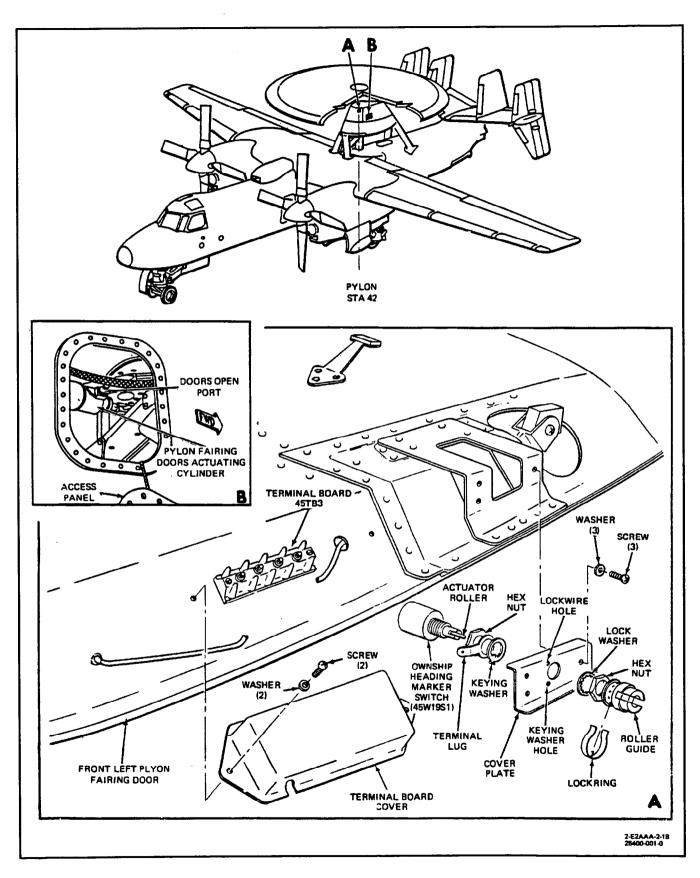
Removal and Installation of Ownship Heading Marker Switch on Moveable Fairing Door
